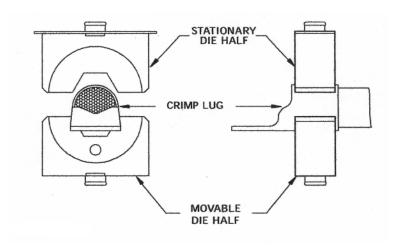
HH80C Hand Actuated Hydraulic Crimp Tool (Sheet 3)
